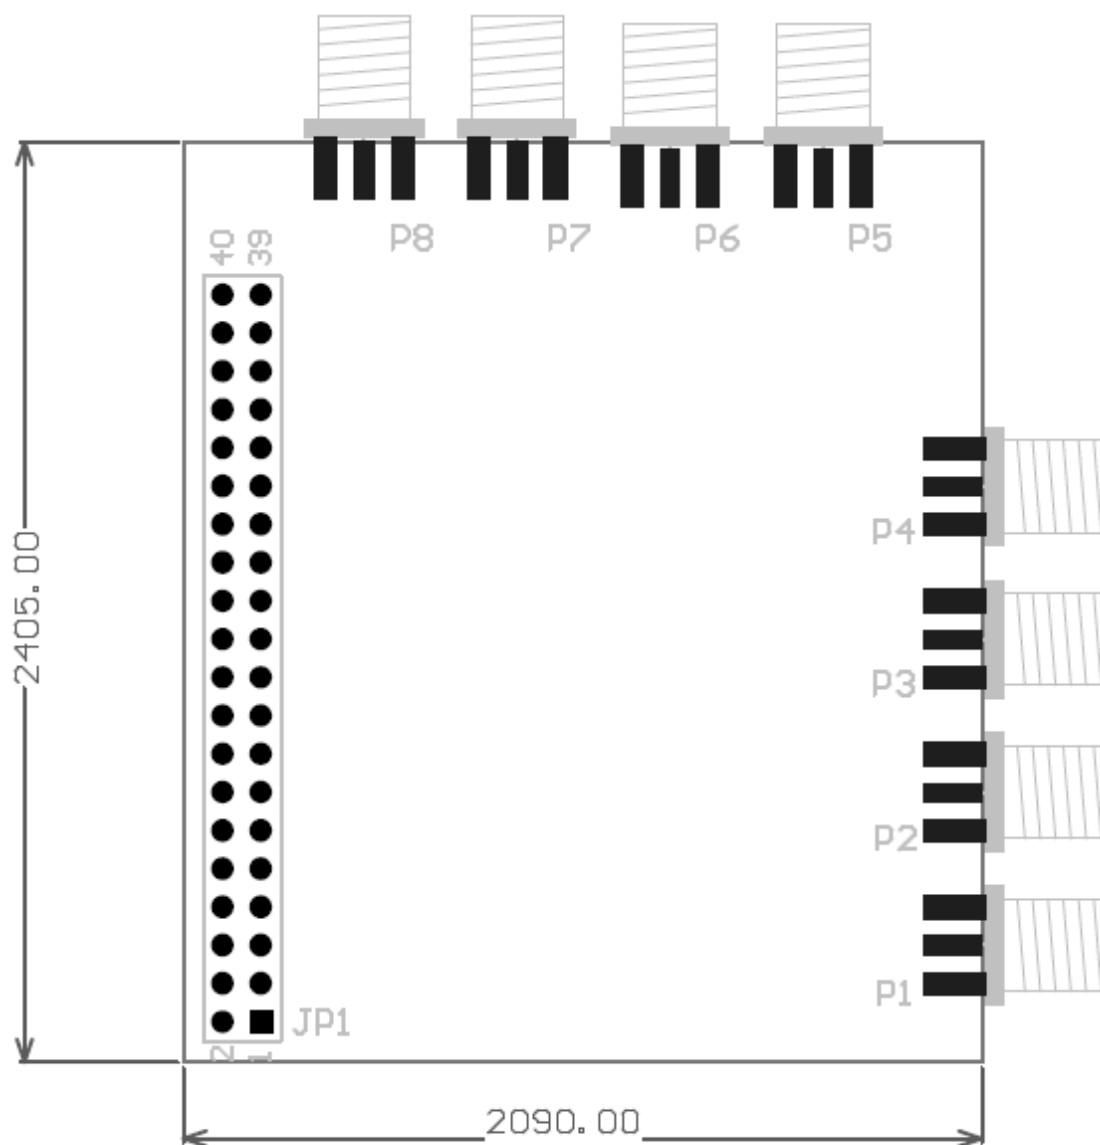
GPIO-to-SMA Testpoint Board Layout
